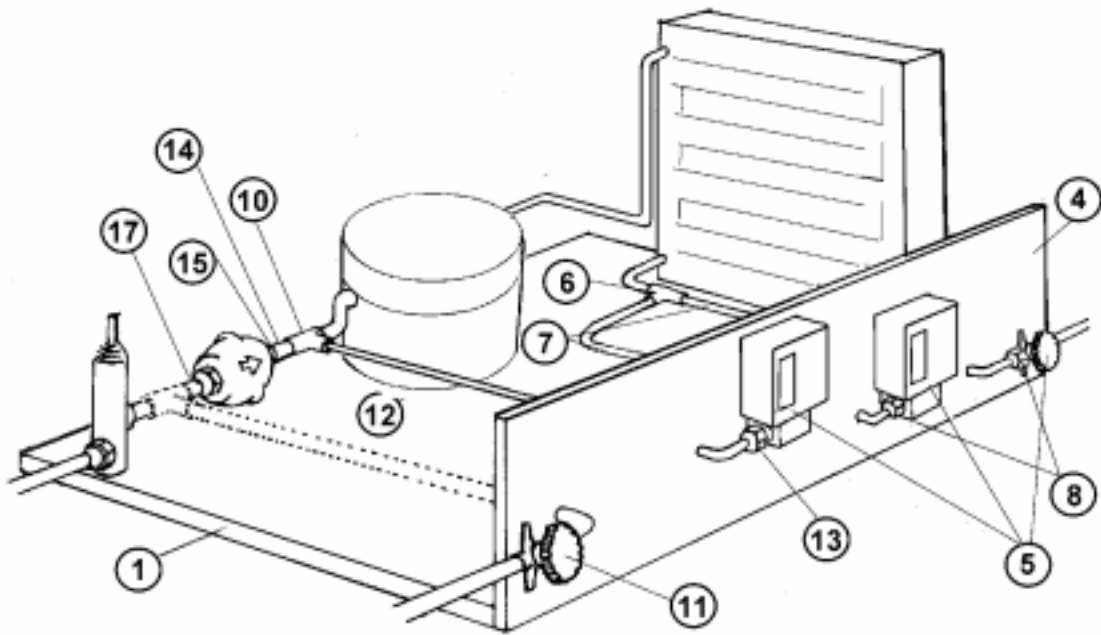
, diagram of recovery machine. Numbers relate to the instructions for assembling the machine.
